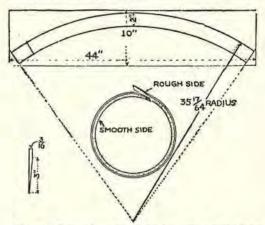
Pattern for cutting clutch facing for a Willys "six" cone clutch. When the old lining is not available to serve as a pattern, secure a piece of first-class, unstretchable belting, 3/16" thick, 10" wide, and 44" long.
